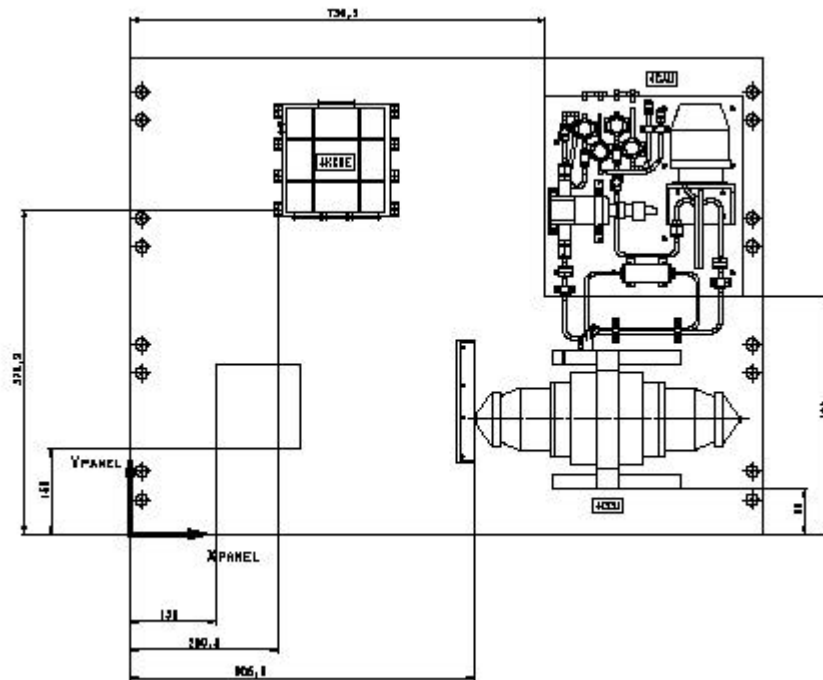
4K PANEL LAYOUT
